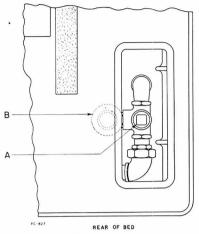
Three-Way Coolant Valve for Pumping Out Reservoir
